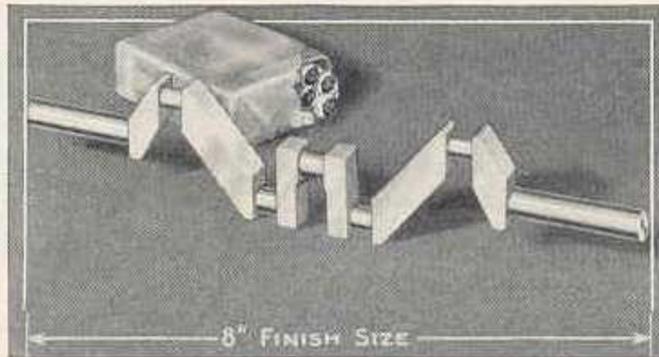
Crankshaft of a Small Marine Motor, Cut from Solid Bar on a 9-Inch Junior Lathe—Actual Size, 8 Inches Long.
